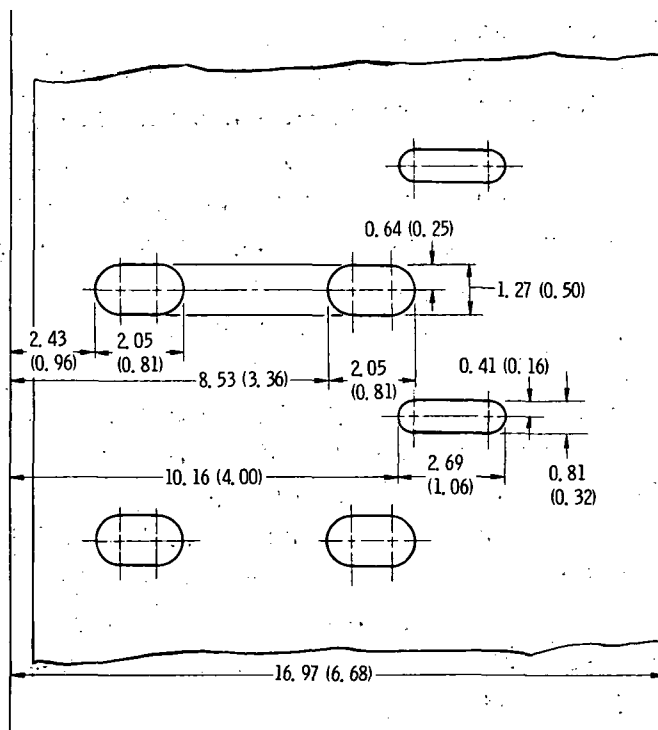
Primary-zone and diluent-zone air-entry hole pattern for final combustor design. Dimensions are in centimeters (in.).
